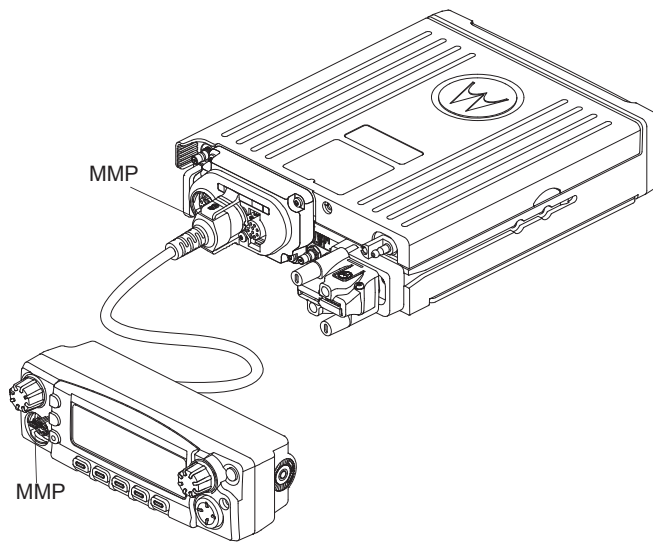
Remote Mount Configuration with Mid Power Transceiver, Transceiver Interface Board, CHIB Rear Assembly and O5 Control Head
